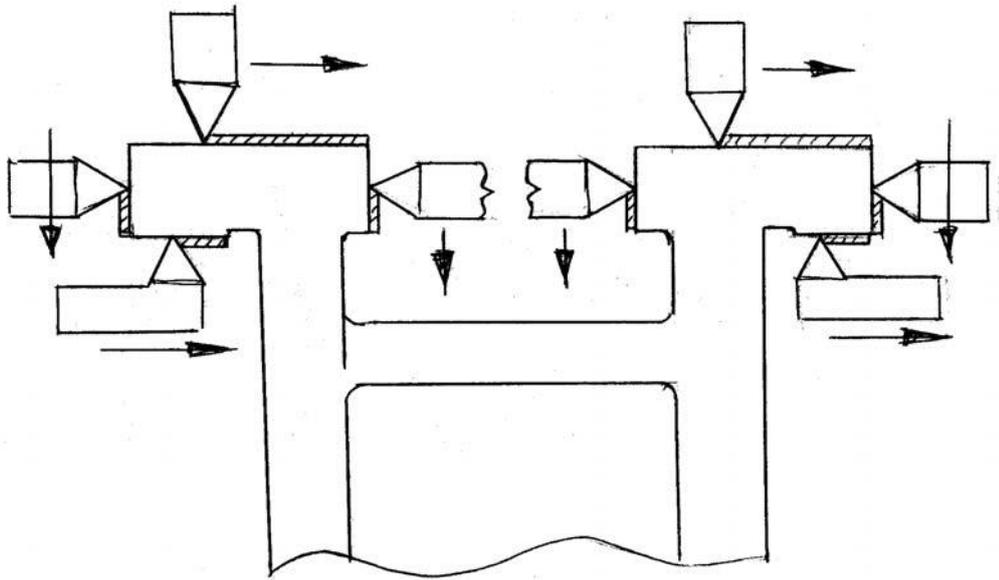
Machining of a machine bed in planing machine
